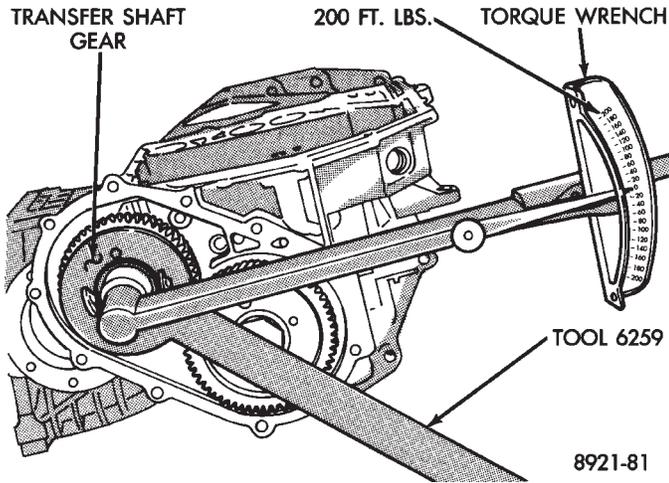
Transfer Shaft Gear Nut and Washer
